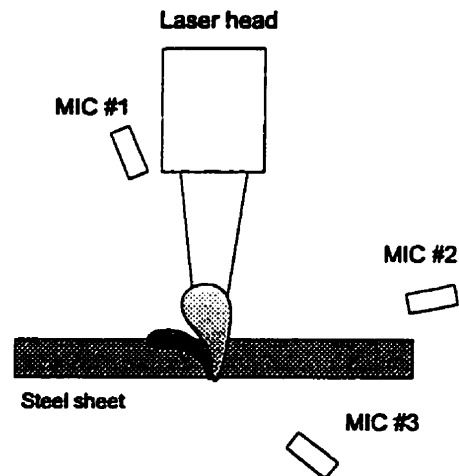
Schematic illustration of experimental setup for laser beam welding and multi-position acoustic detection.
